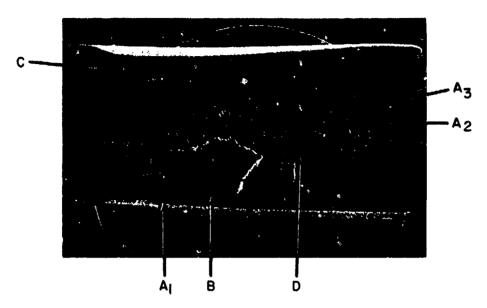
Fatigue fracture surface of a temper-embrittled A-514 weldment containing LOP, 8x.
